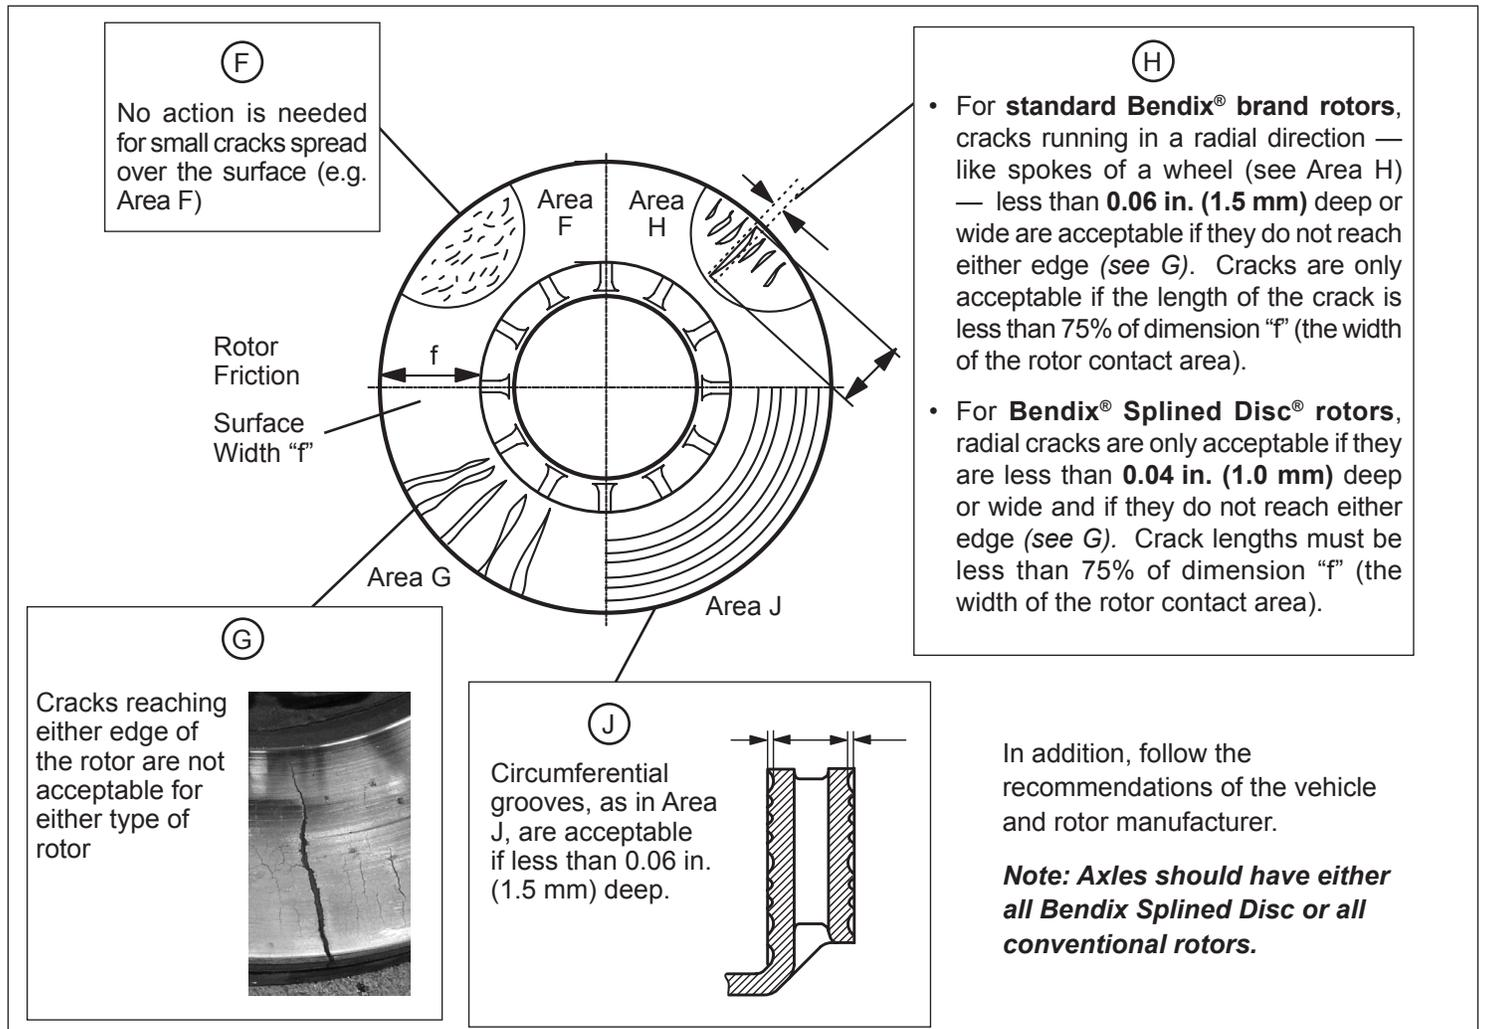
Examples of Acceptable and Non-acceptable Rotor Conditions
